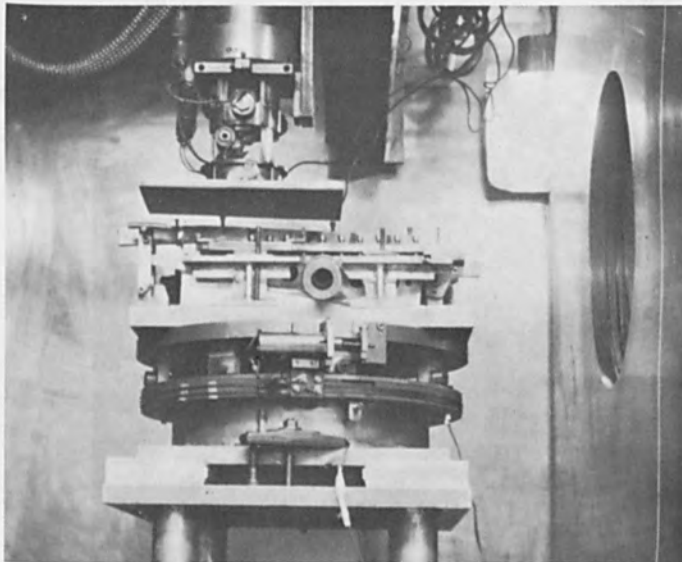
View of welding chamber with welding fixture and vane in welding location under the electron beam welding head.
